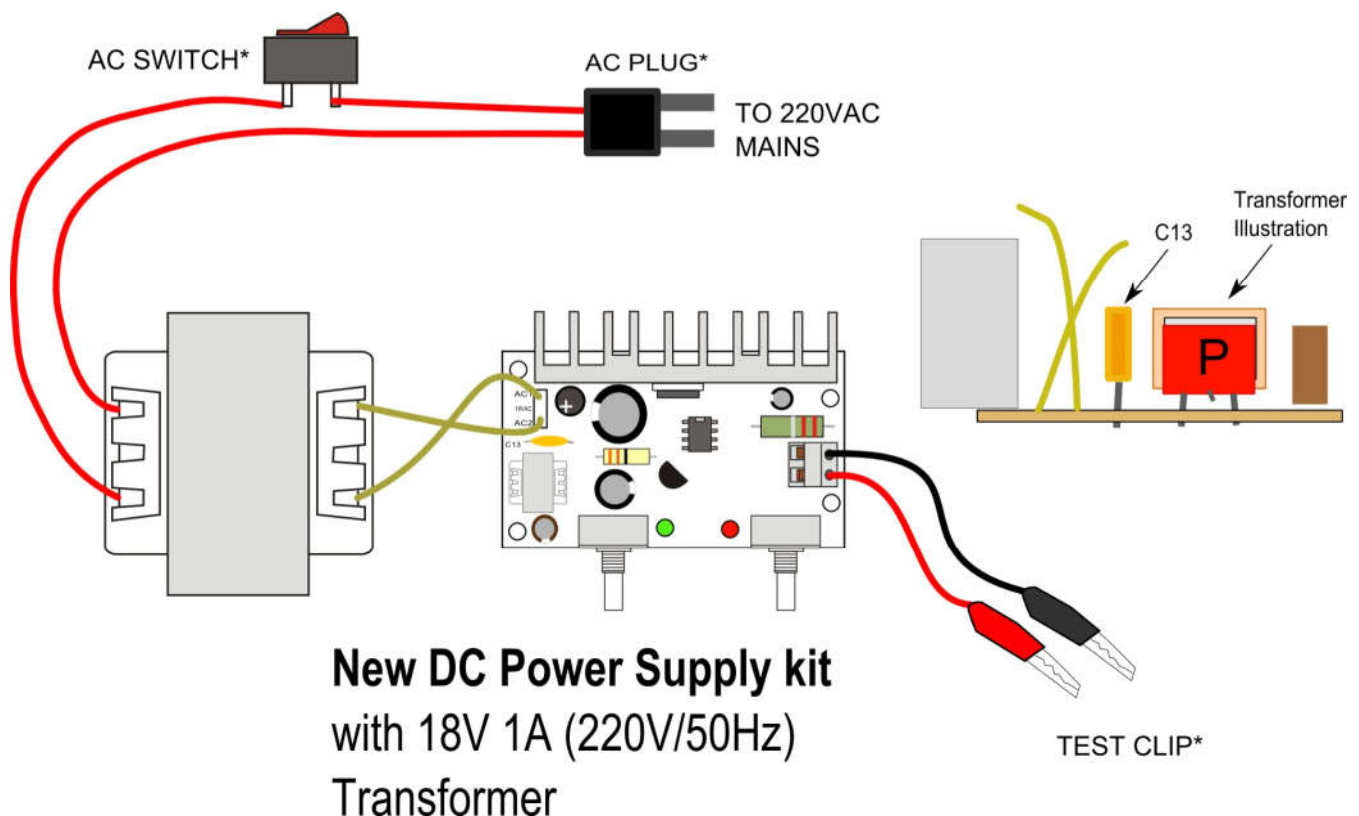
Wiring guide to connect off-PCB components. Note, wire colors of the transformer may change, hence, should always be checked with the actual transformer supplied with the kit. Any change in wiring color will be promptly indicated in the transformer label.
